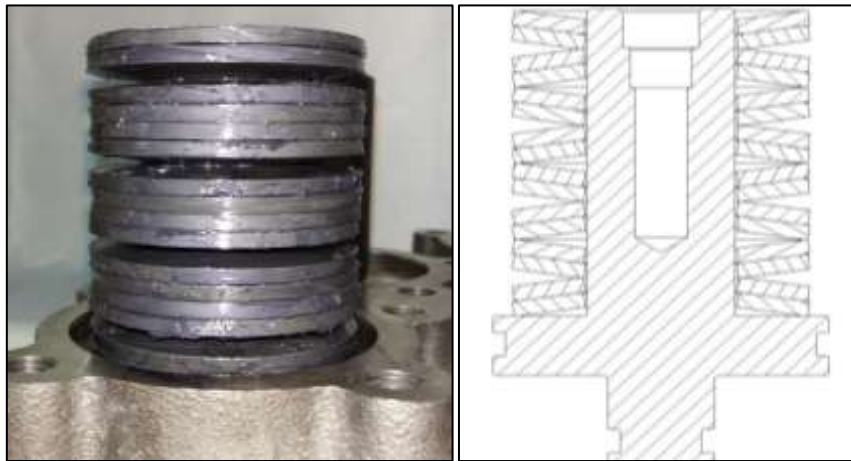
Disc springs installed on Failsafe Emergency brake piston.
